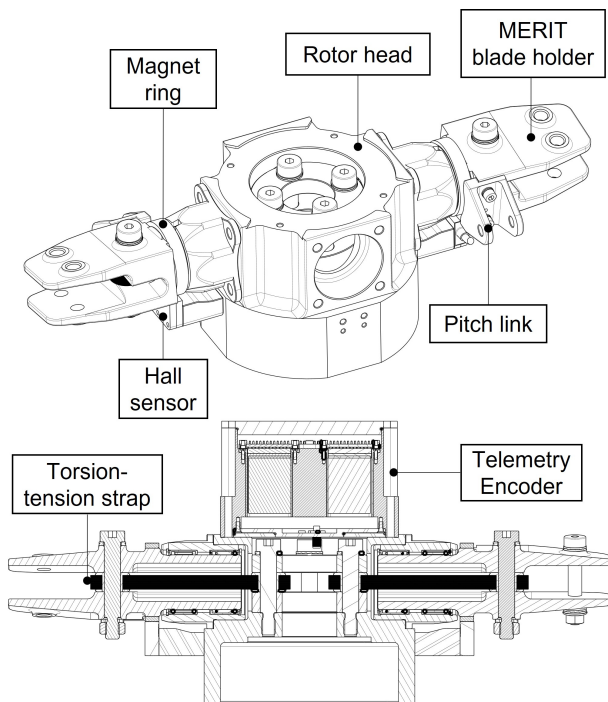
Rotor head with two blade attachments in isometric and sectional view without and with telemetry encoder on top
